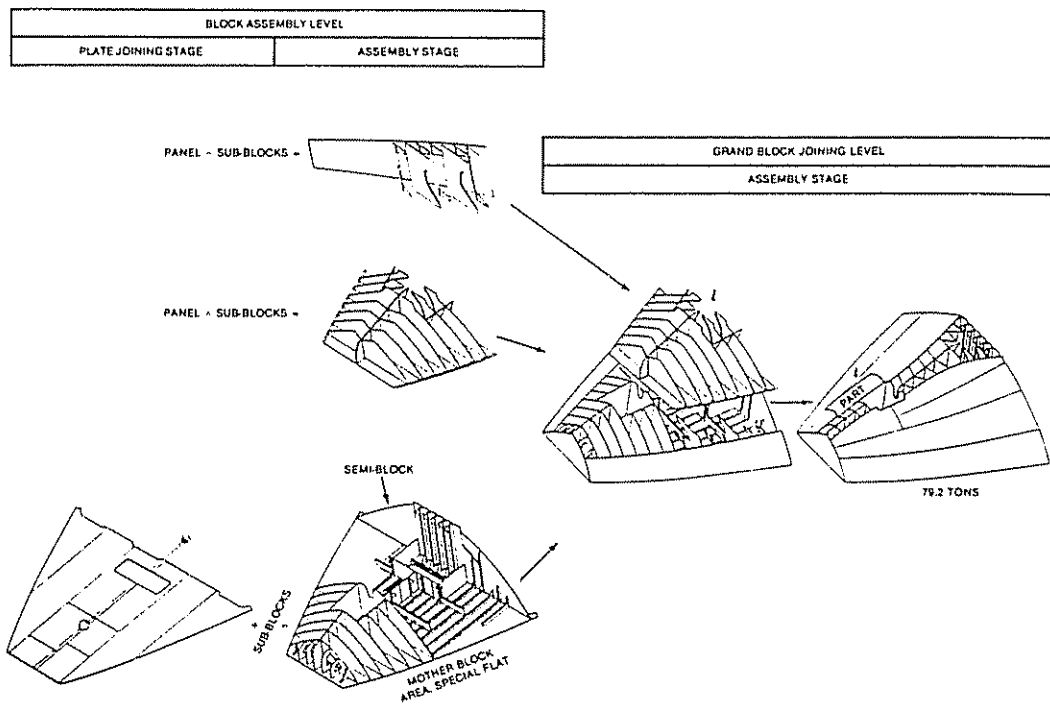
Block assembly and grand-block joining, showing a cant block
